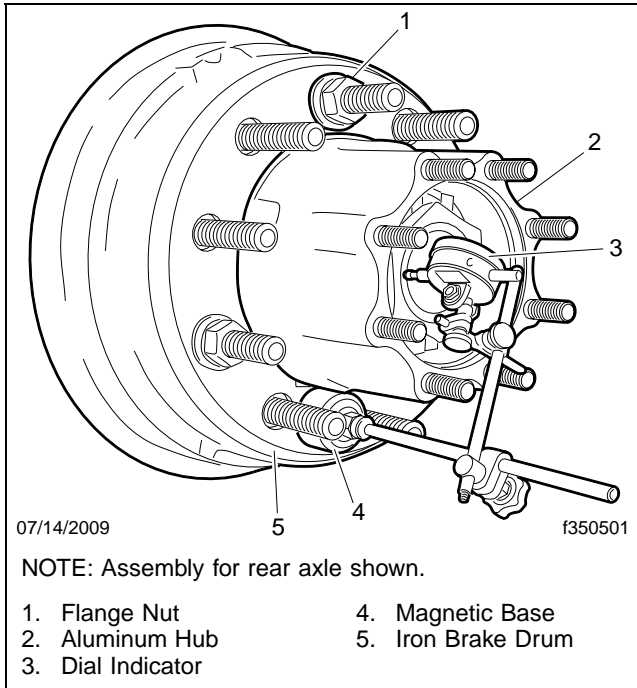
, Dial Indicator Setup, Aluminum Hub with Iron Brake Drum (rear hub shown)
